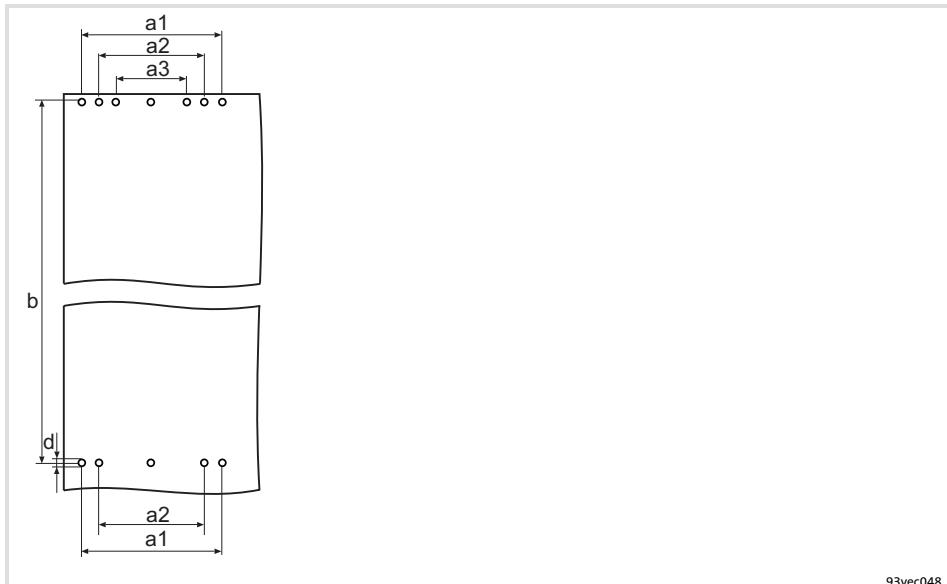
Bore holes in the mounting plate for fixing the controller
